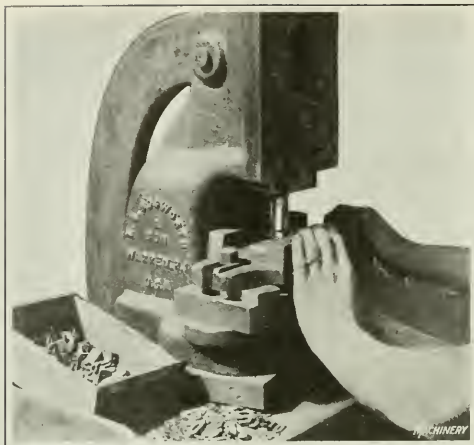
Assembling the Fiber Flanges, using a Foot Press
